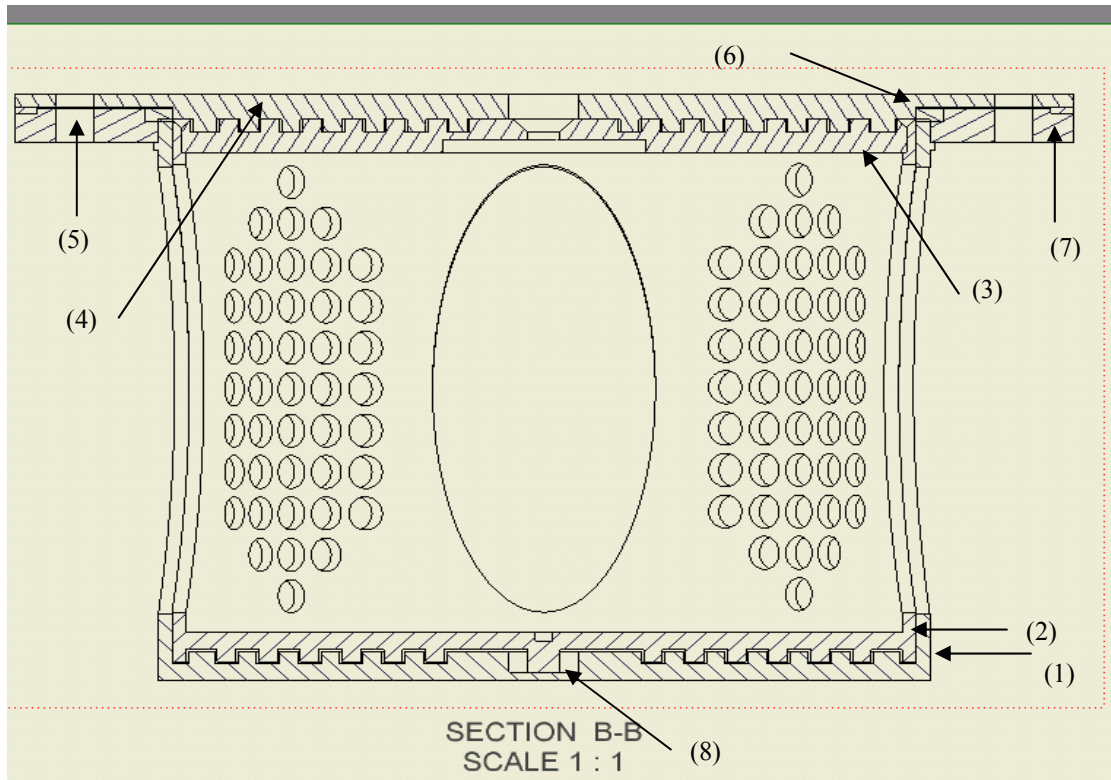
Valve Assembly - (1) Outer Cylinder; (2) Inner Cylinder; (3) Top Plate; (4) Top Cap; (5) Assembly Bolt Holes; (6) Copper Gasket; (7) Steel Washer
